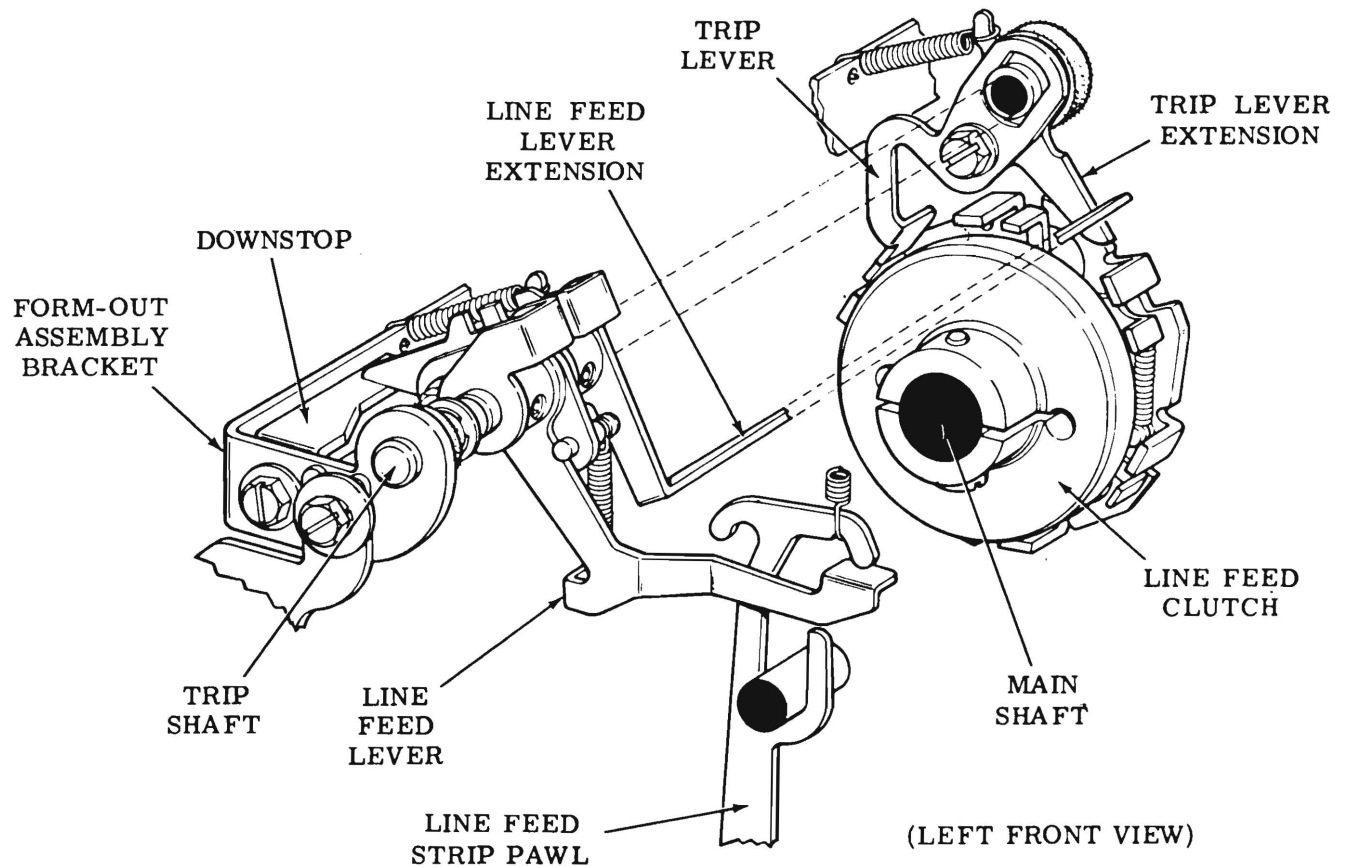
Form-Out Mechanism (Sprocket Feed)
